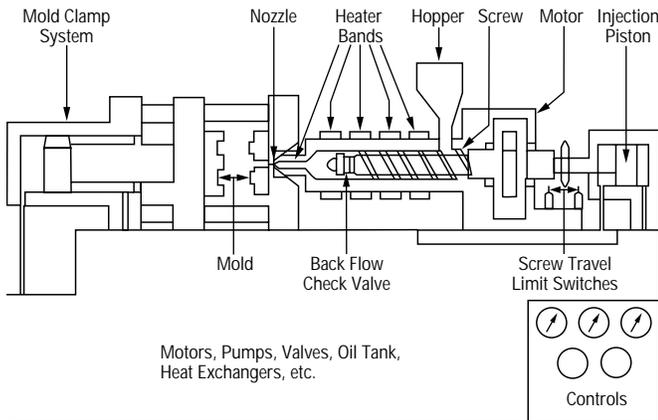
Schematic of Reciprocating Screw Injection Molding Machine
